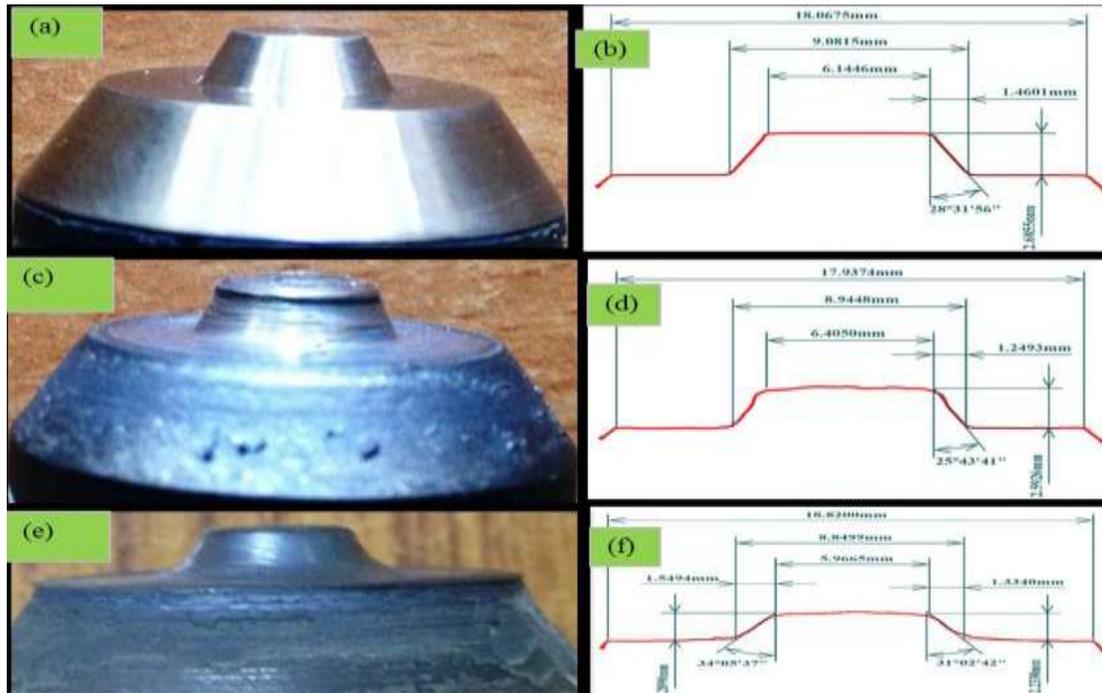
Tool pins and shoulder profiles before and after welds; (a) & (b) before welding, (c) & (d) after welding for tool T1, (e) & (f) after welding for tool T2 [22]
